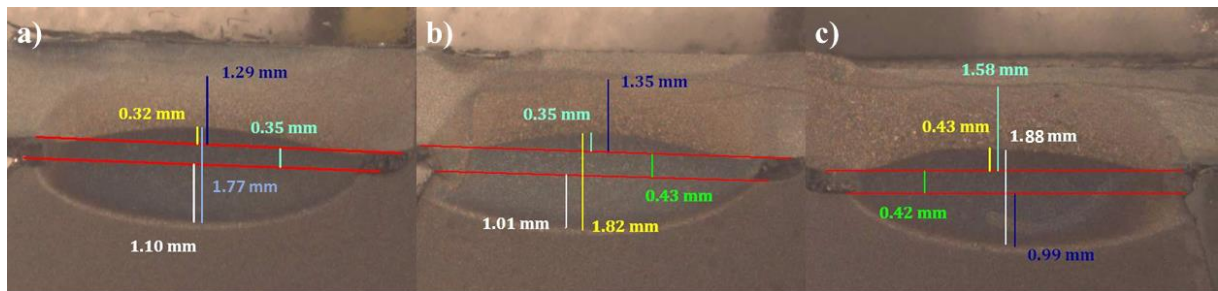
Electrode’s Wear Study: Weld Nuggets Macrographs with measurements: a) 0 welds; b) 2500 welds; c) 5000 welds.
